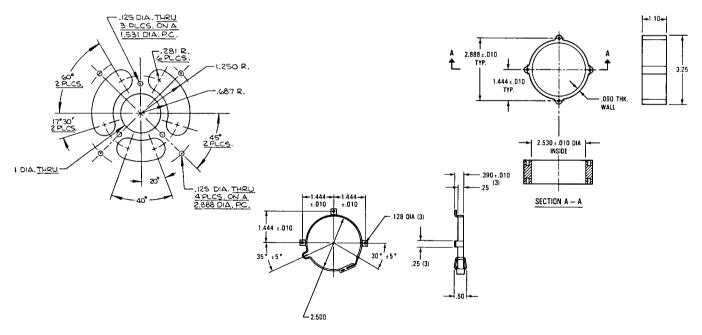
Mounting Plate, Chimney SK-1906 and Clamp SK-1916, for SK-1900 Socket Assembly
